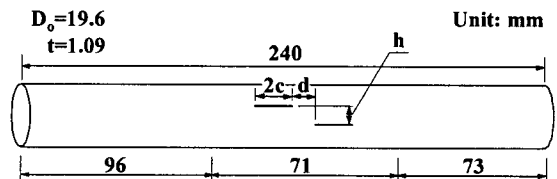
Geometry of tubular specimen containing non-aligned two axial through-wall cracks
